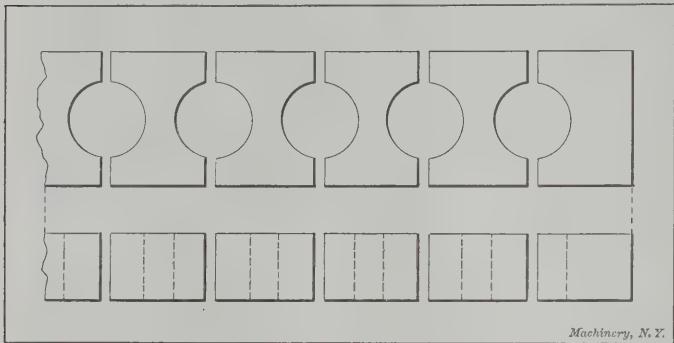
Detail of the Clamping Blocks used in one of the Fixtures shown in Fig. 21
